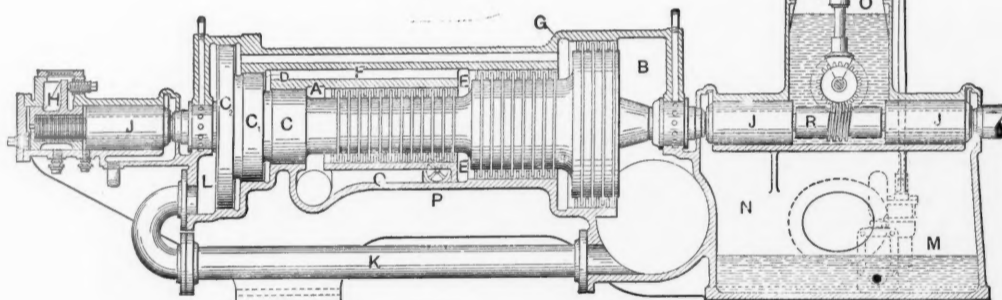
Westinghouse-Parsons Steam Turbine—Longitudinal Section.
